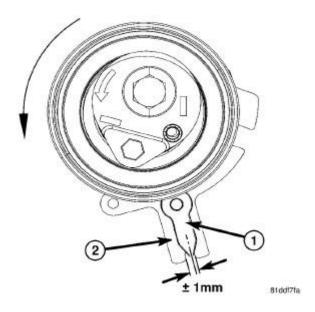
Timing Belt Tensioner Load Indicator & Gauge Courtesy of CHRYSLER LLC
